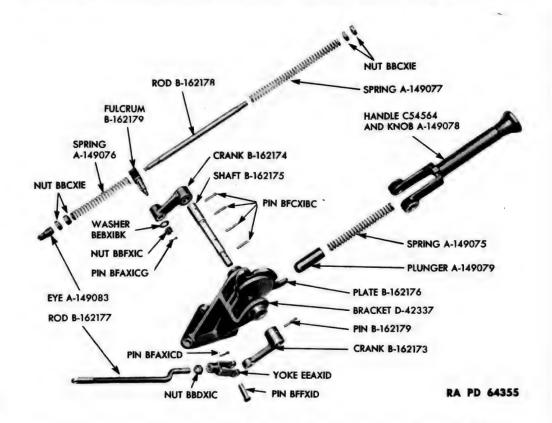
Hydraulic Gear Switch Assembly—Exploded View
